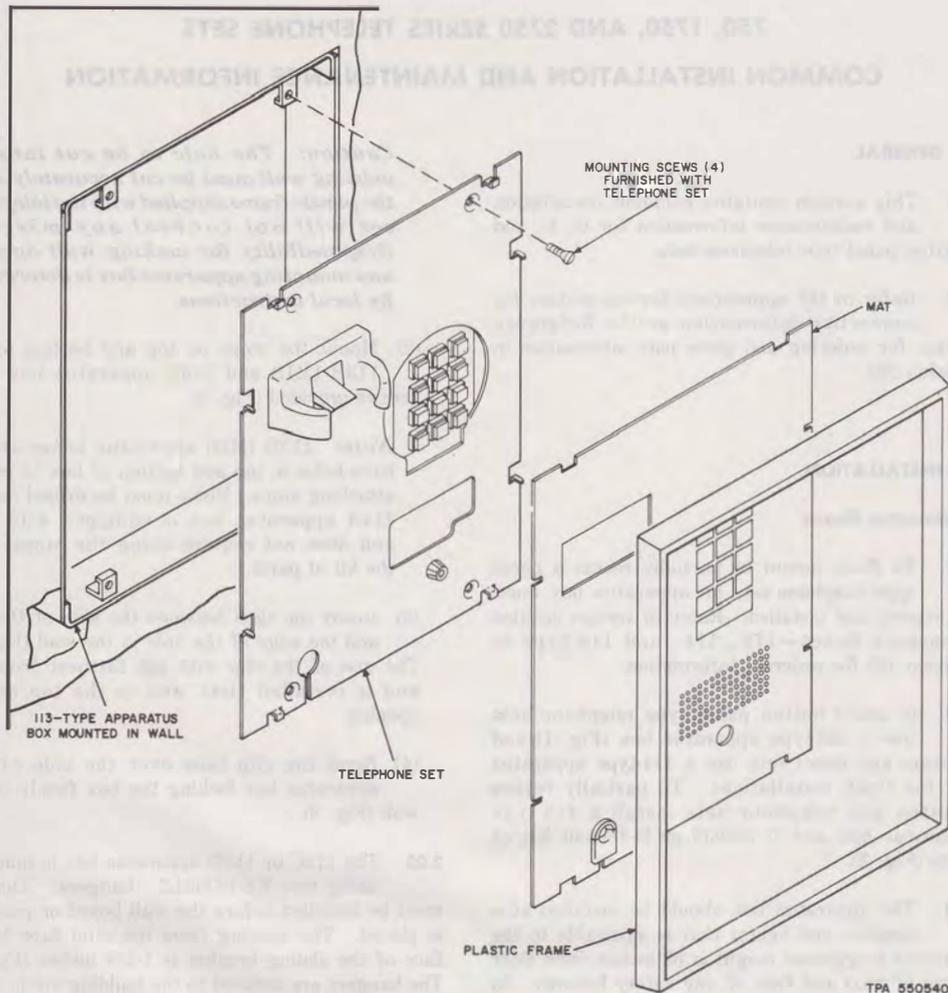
Typical Installation of Panel Type Telephone Set (Recess Mounting)
